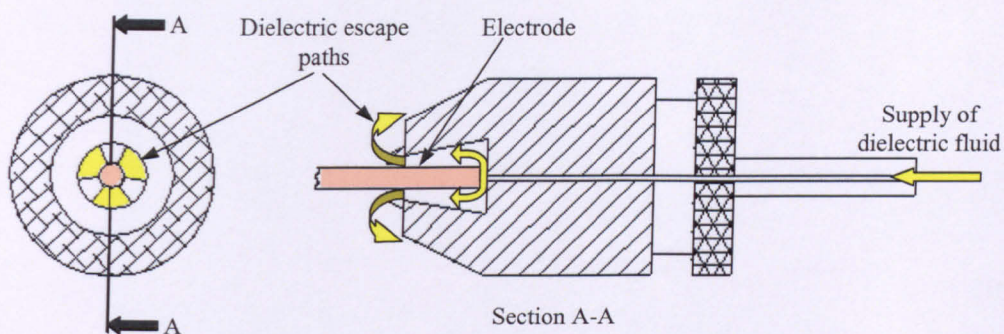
Sketch of the old EDM chuck, mounted electrode and dielectric escape paths
